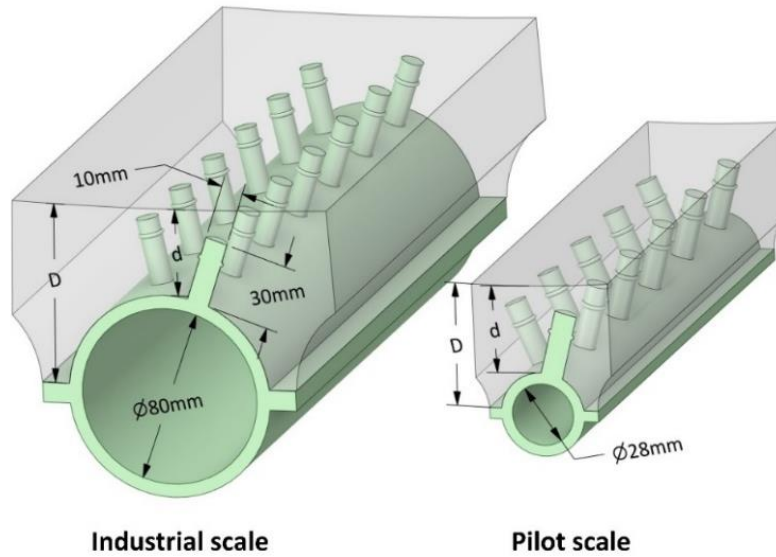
Cooling pipe, anchors, and refractory wall depiction for pilot and industrial scale
